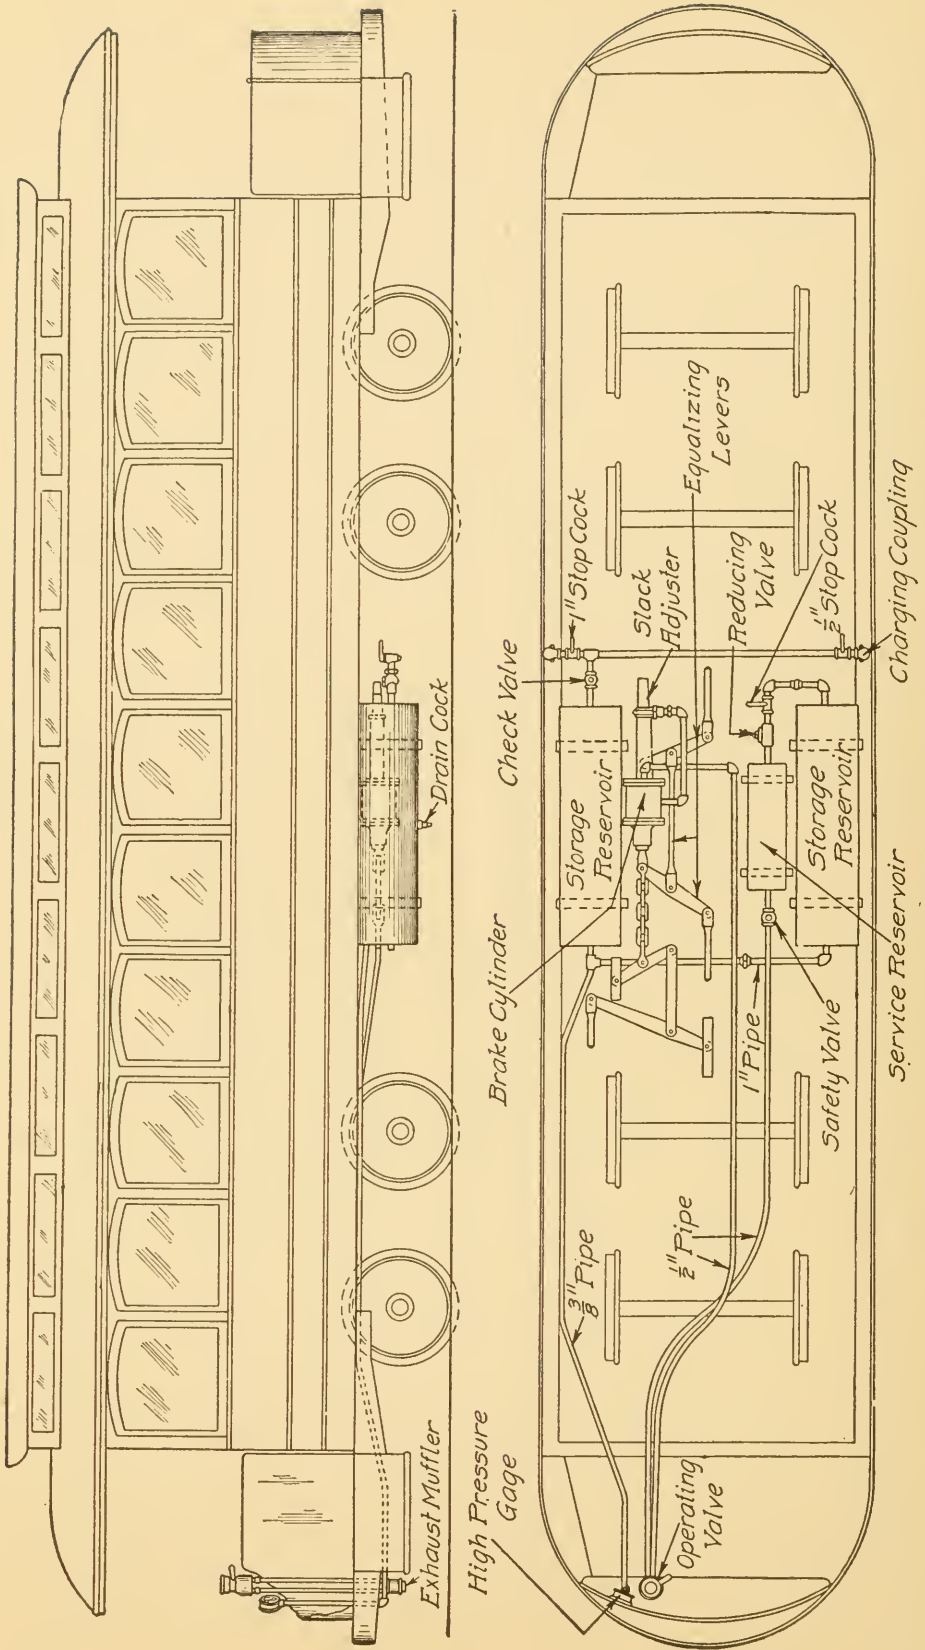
General Layout of Storage Air-Brake Equipment on a Street Car
